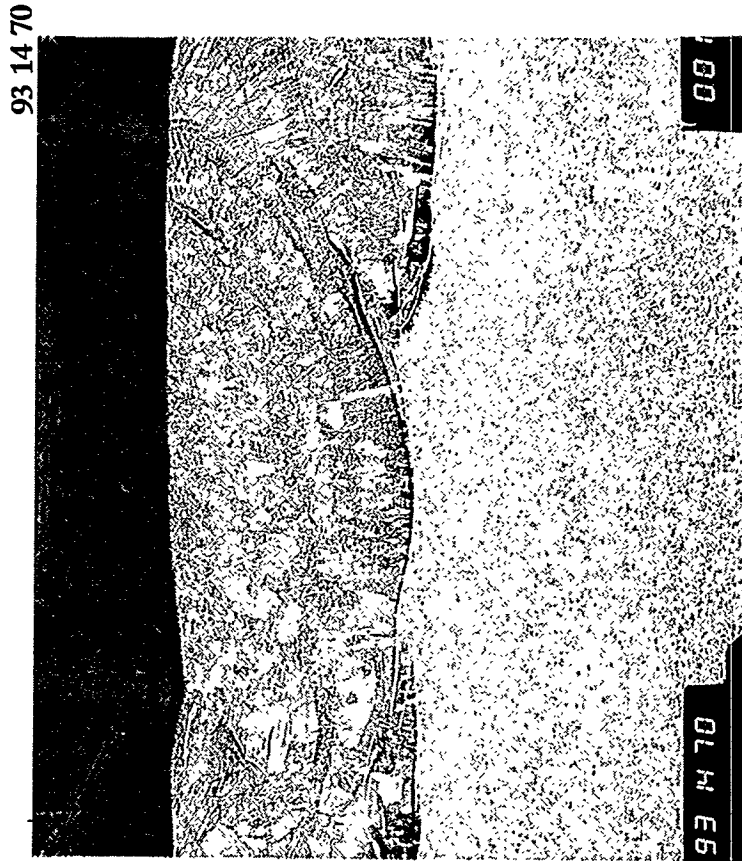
Typical single layer GTA weld overlay (on type 304 stainless steel). 13x magnification. Deposit is approx. 3 mm thick.
